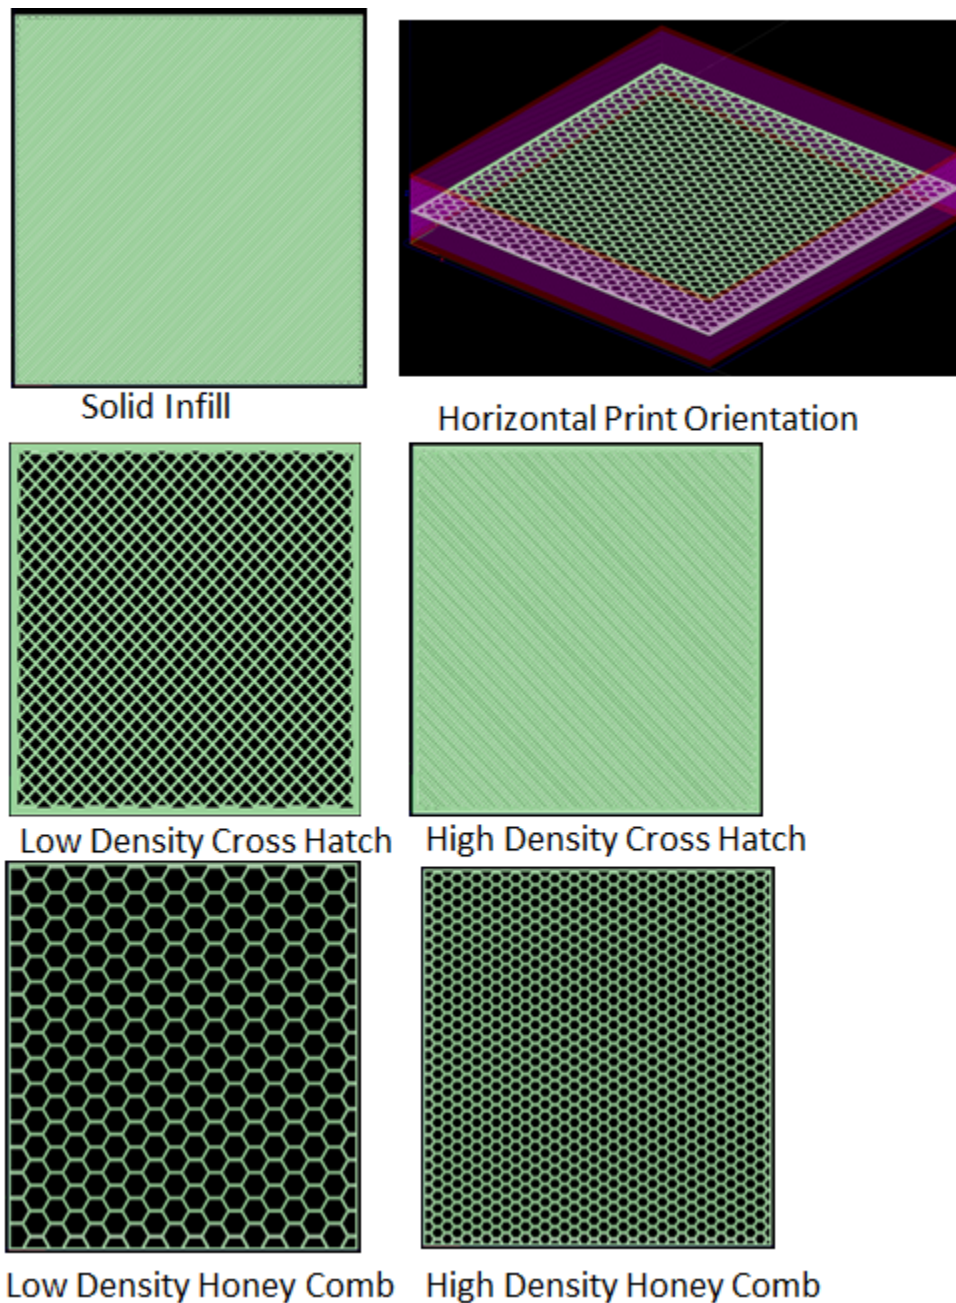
Example test coupon geometry and various in-fill patterns for the horizontally 3D printed parts.
